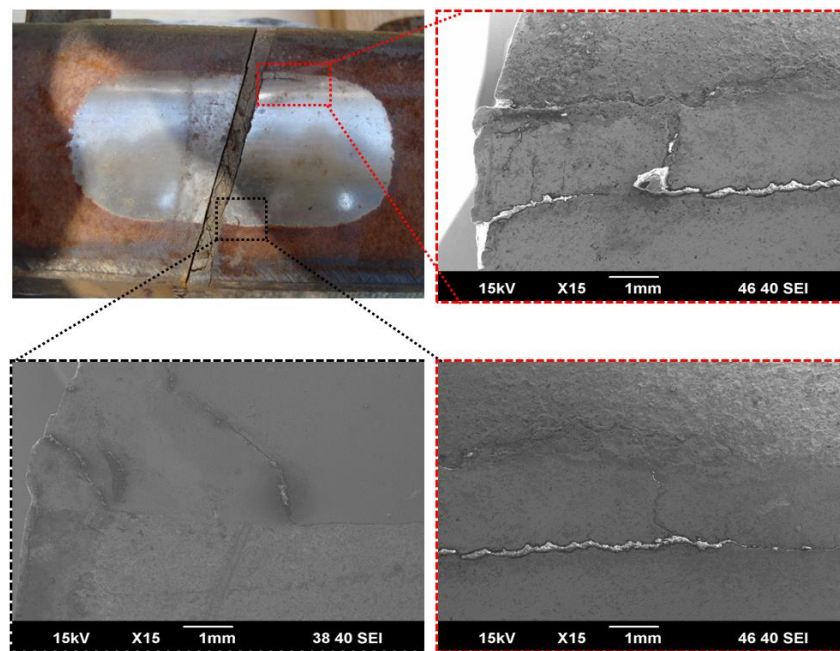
Cracks formation around the edges of the weld interfaces.
